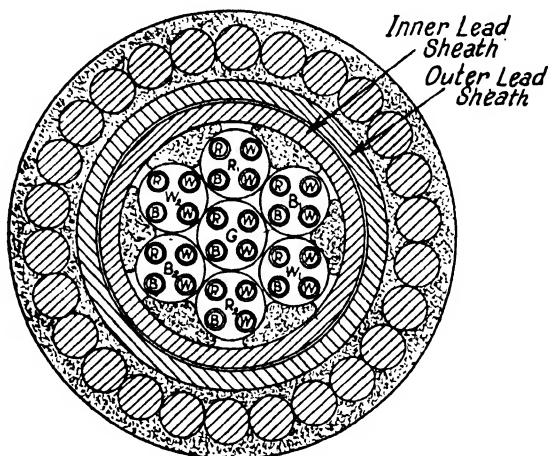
CROSS-SECTION OF PAPER-CORE SEA CABLE
